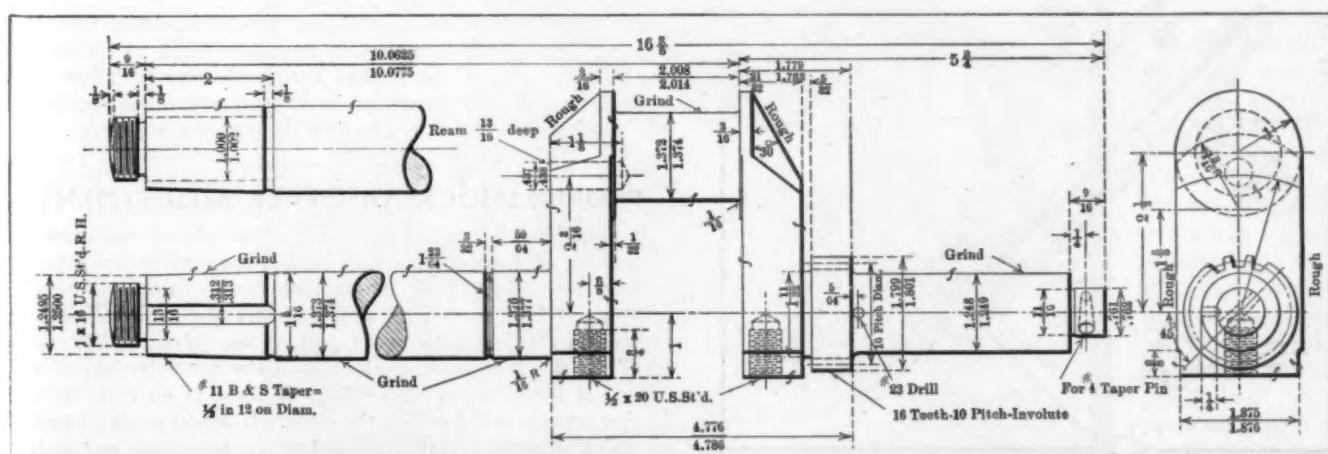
Crankshaft of 40-point carbon open hearth steel, with liberal bearings surfaces, stout arms and means of direct and auxiliary balancing by thorough use of an auxiliary balance gear
